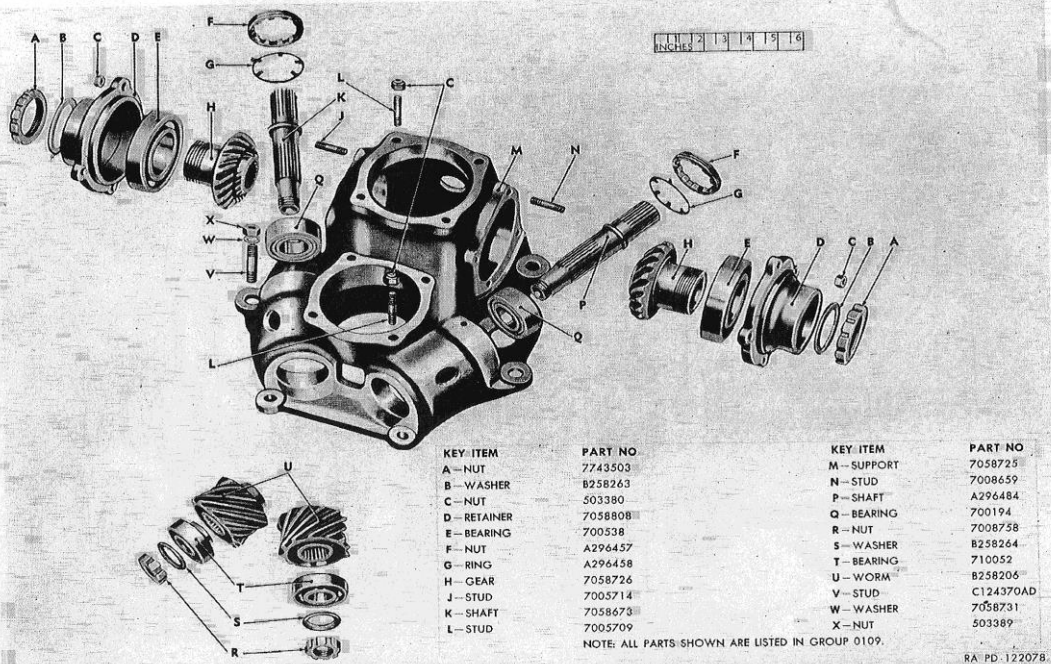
Accessory drive support, gears and shafts, exploded view.
